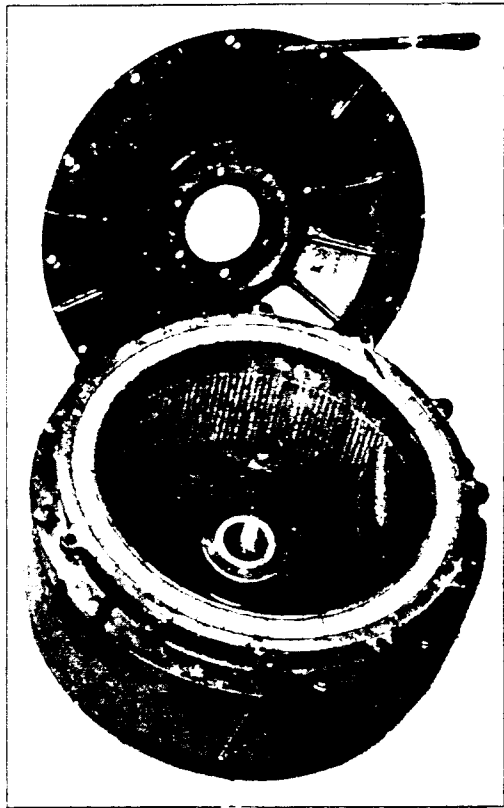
INTERIOR OF ELECTRIC MOTOR.
